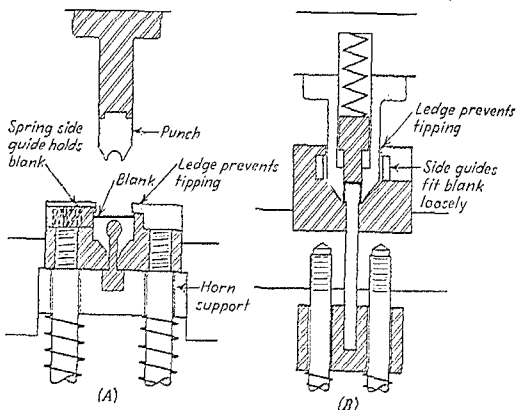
Horn-type die for forming open tubes.¹¹
